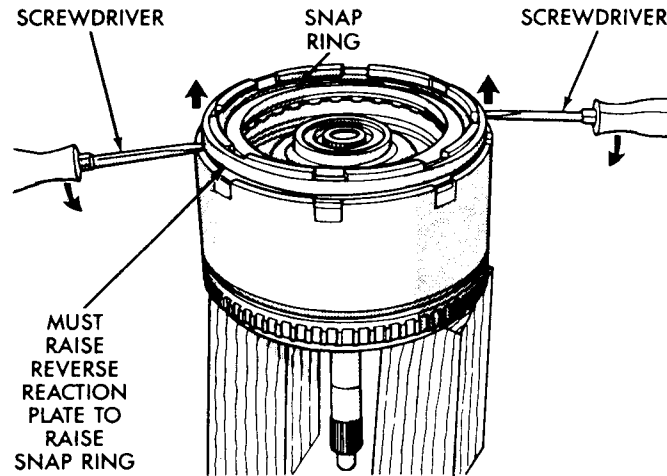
Seating Snap Ring to Determine Reverse Clutch Clearance
